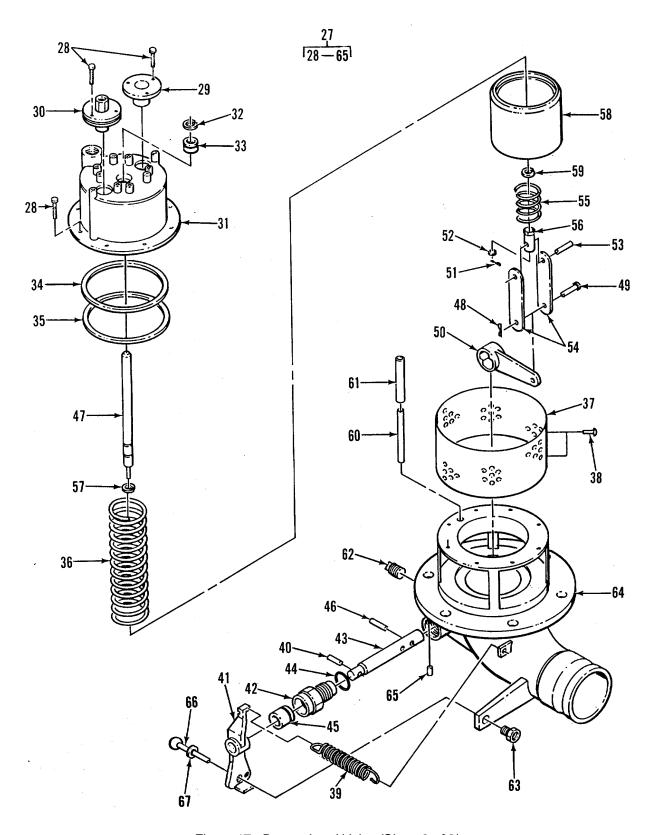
Bottom Load Valve (Sheet 2 of 2)
